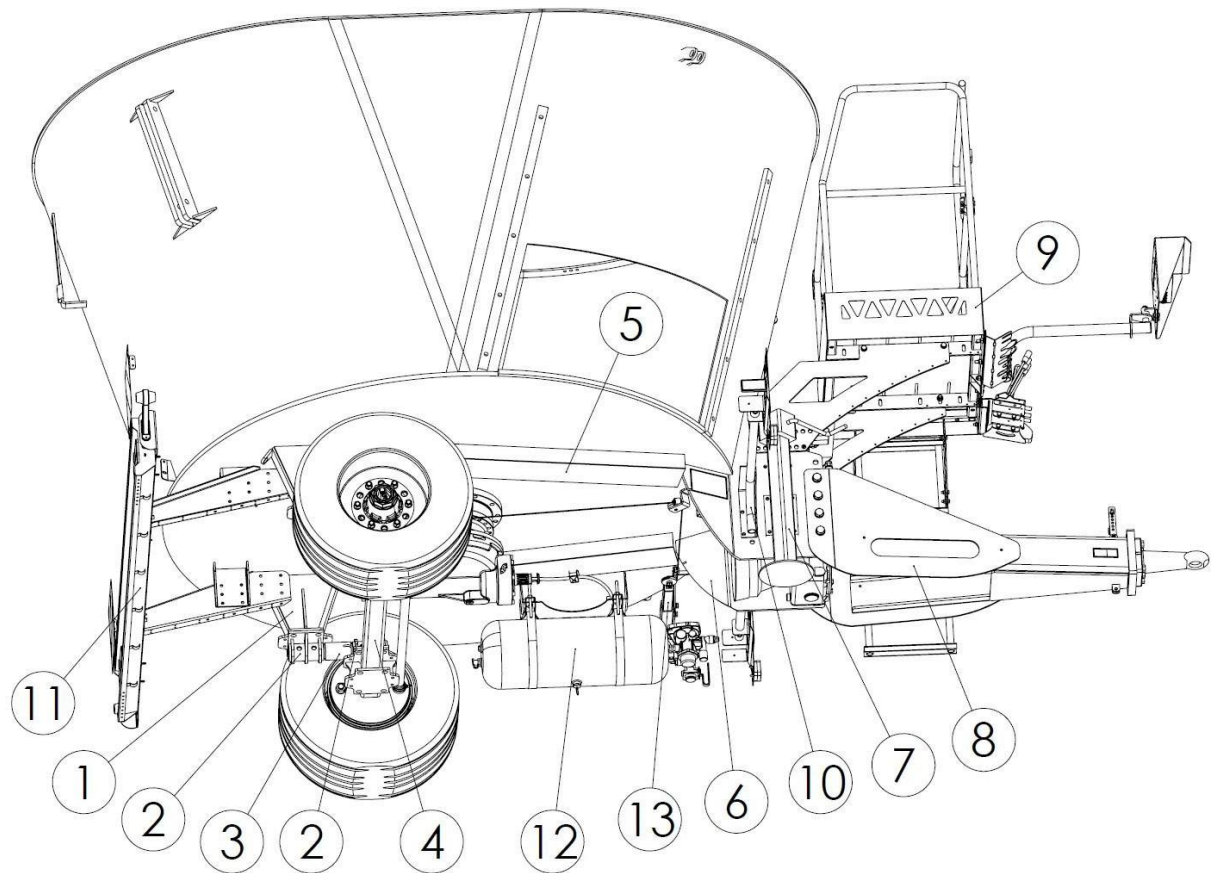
Chassis of the OPTIMAL T659/1 feeder wagon: 1 - base, 2 - tensor fixture, 3 - balance tensor, 4 - axle, 5 - bottom reinforcing C-profile, 6 - front panel, 7 - foot, 8 - drawbar, 9 - folding platform, 10 - front light arm, 11 - light bar, 12 - air tank, 13 - parking brake
